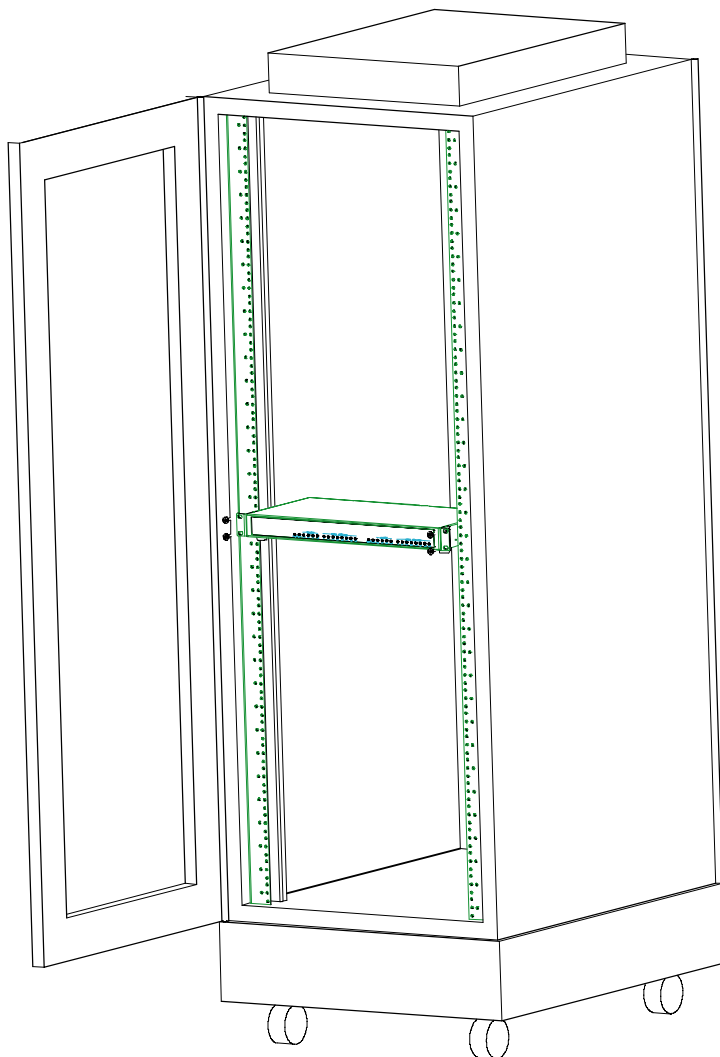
Rack-Mounting (MVPFXS-8/16/24)
